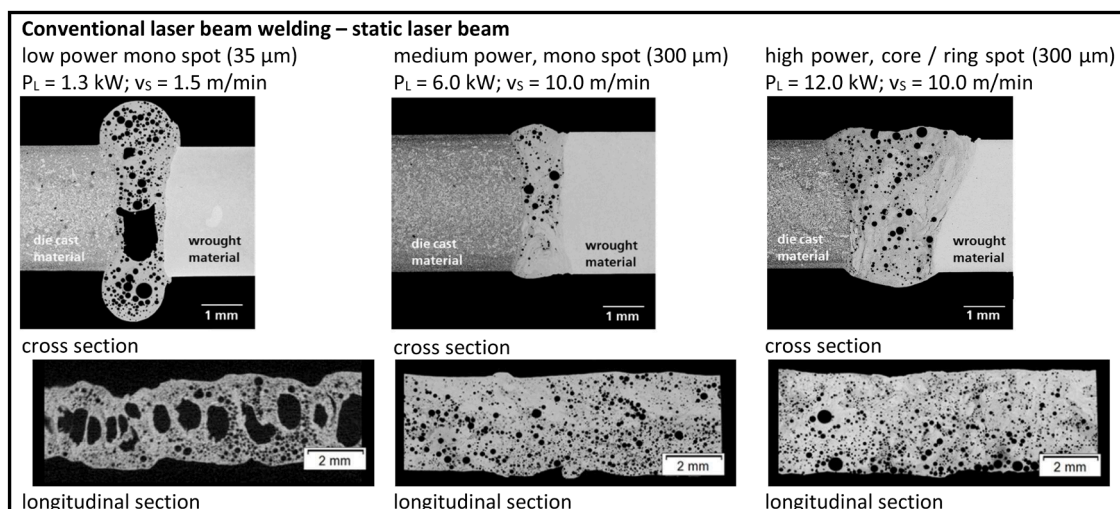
Typical weld seam defects for laser welded aluminum die-cast material using conventional process parameter (static laser beam).
